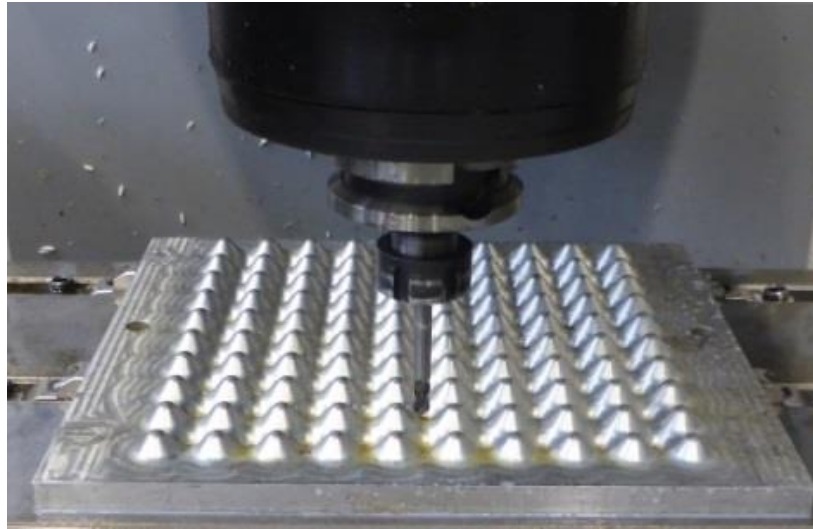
Milling cutter and work piece in Haas CNC milling machine
